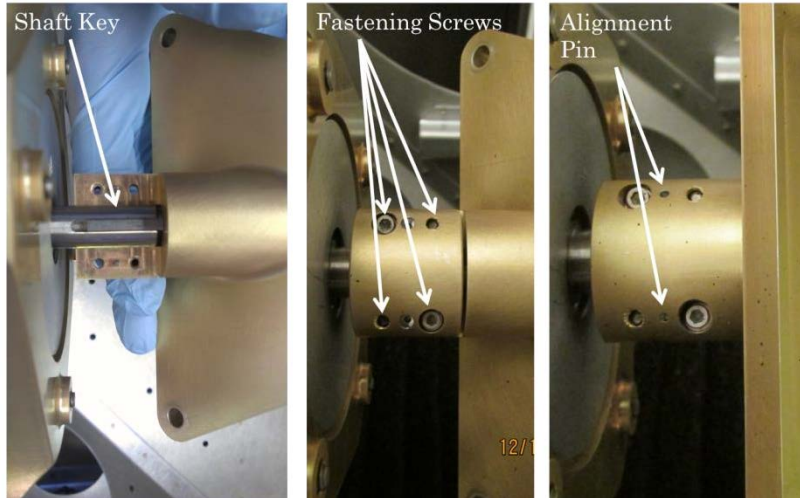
Hardware for Attaching the Scanning Flight Reflector to the Motor Shaft.
